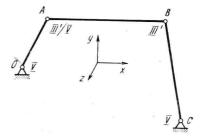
Diagram of a four-joint mechanism for detecting preloads in assembling
